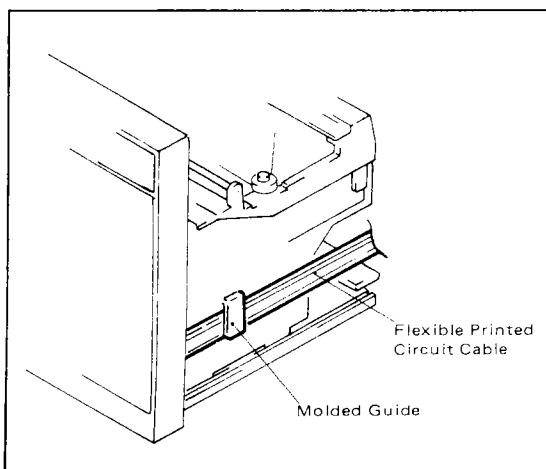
Inserting Flexible Printed Circuit Cable.
